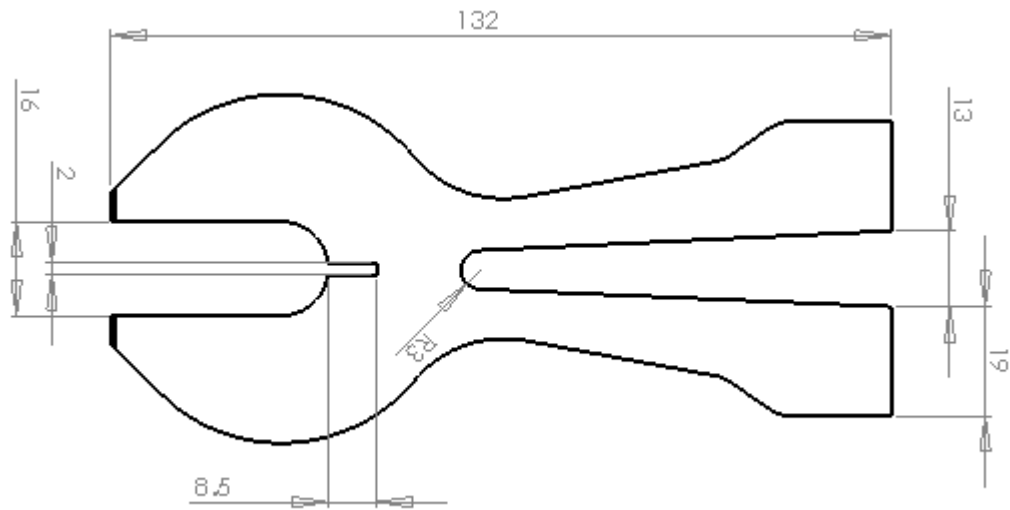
The design used for the blades for samples 3 and 4. All dimensions in mm
